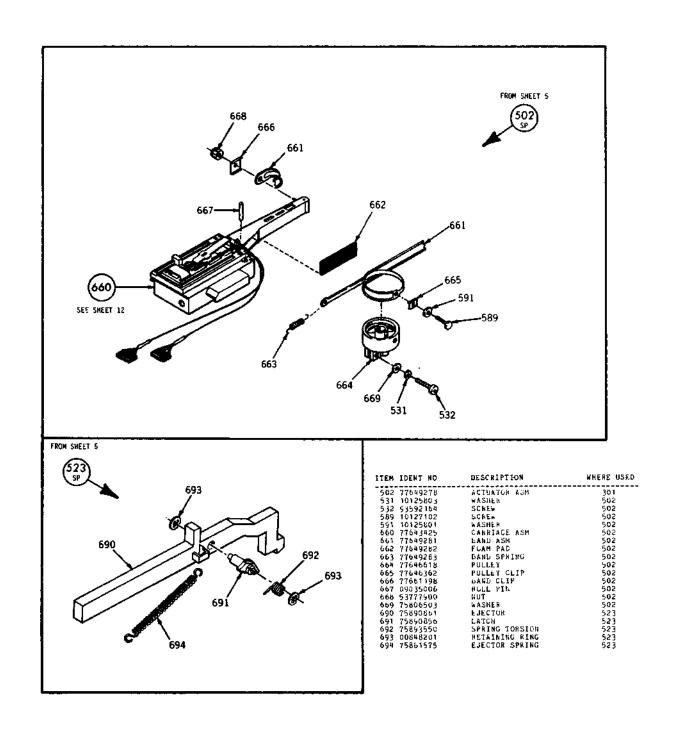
ACTUATOR AND EJECTOR ASSEMBLIES
